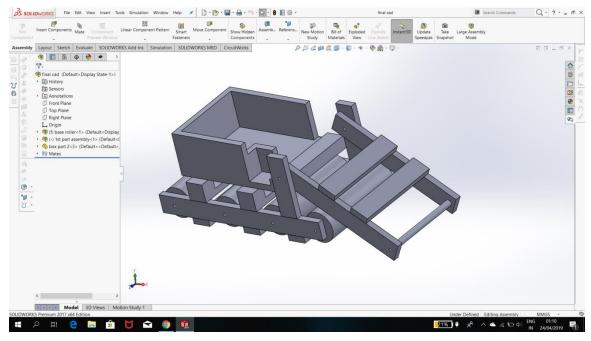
SOLIDWORKS model of Complete Assembly
